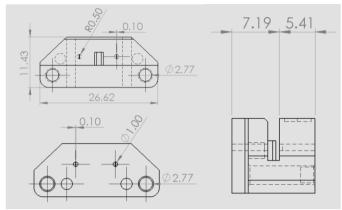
A design of encoder module. Top-left: a transmitter side of the encoder module, which has a separation block between the two light source. Bottom-left: a receiver side of the encoder module. Right: the two modules are connected with the mounting hole.
